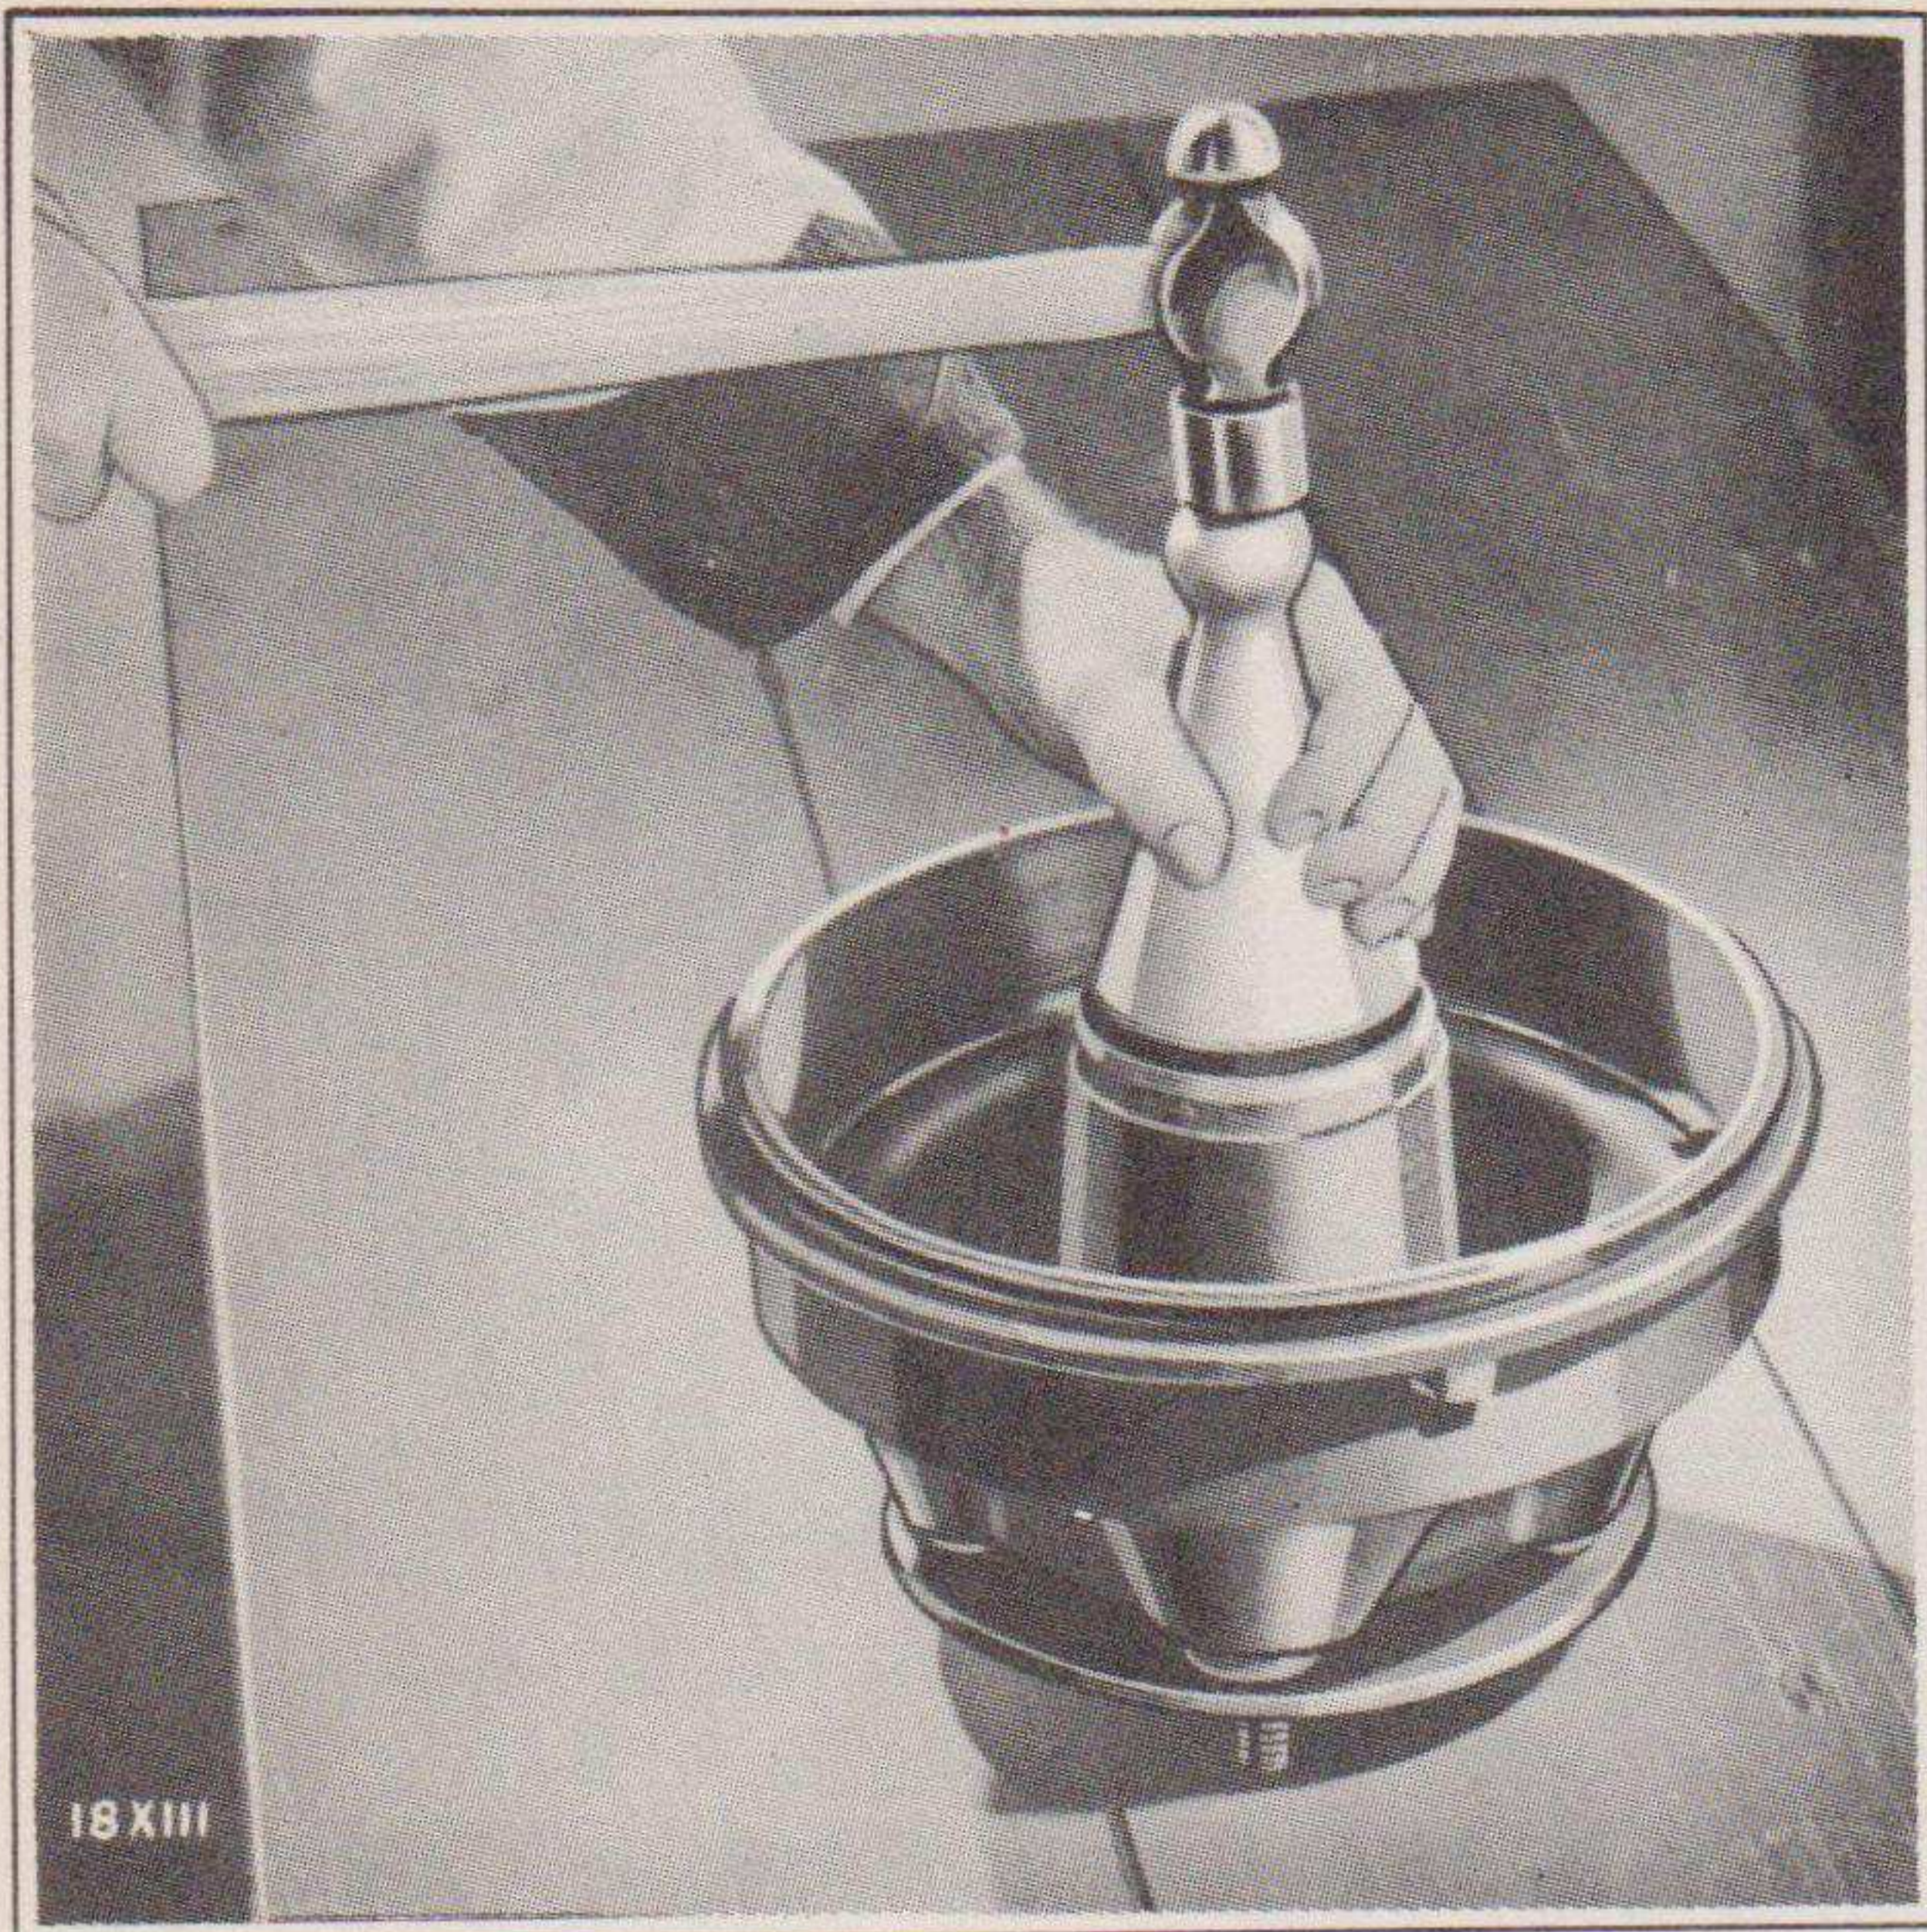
Installing Wheel Bearing Oil Seal (Tool DD-808)
